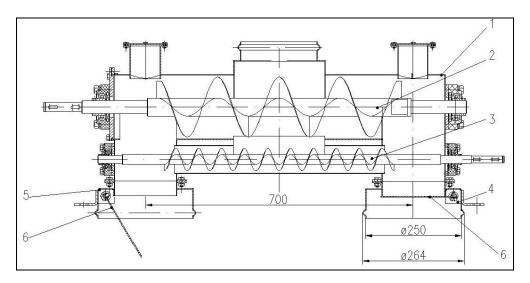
Constructive scheme for the Dosing group [2] 1- Framework; 2- Auger for coarse dosing; 3- Auger for fine dosing; 4- Evacuation 1; 5- Evacuation 2; 6- Flap
